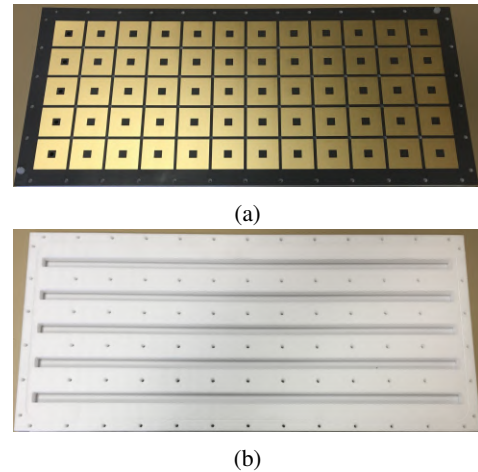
(a) Top cover F4BM220 substrate (b) Bottom plate machined PTFE
